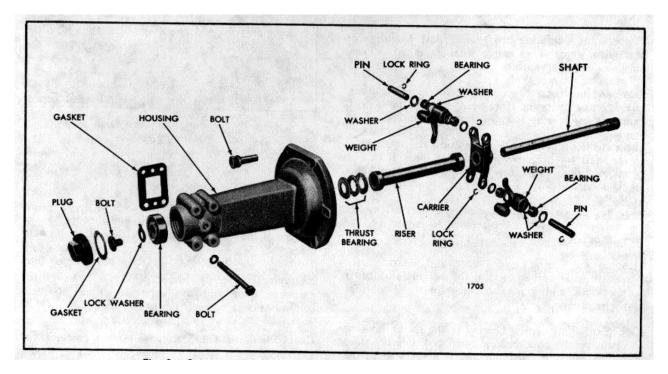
Governor Weight Housing Details and Relative Location of Parts
